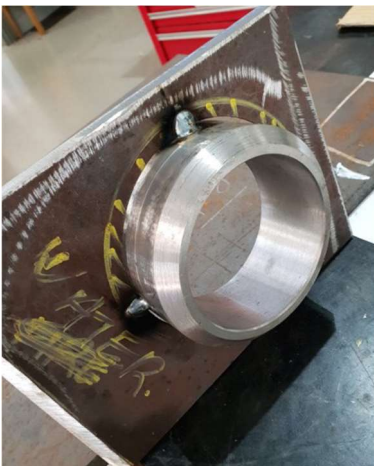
The fire hole ring tacked in place in the rear plate. This can be fully welded to make a complete sub-assembly before the next step.
